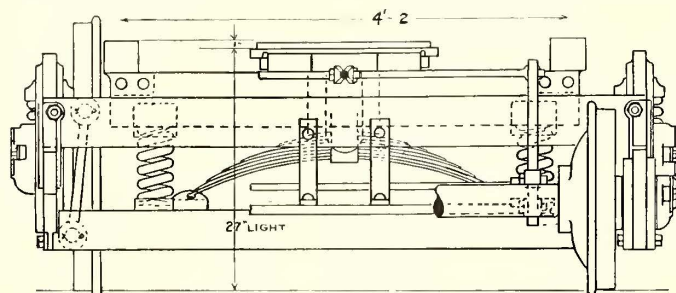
SECTIONAL VIEW OF SWING BOLSTER
